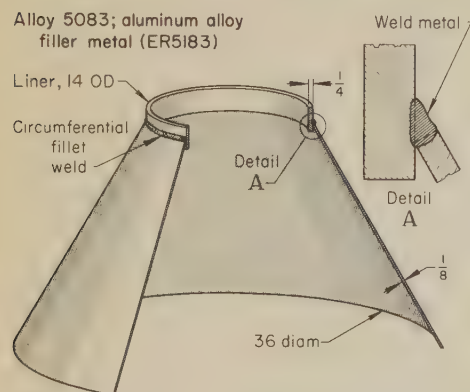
Cone and liner ring that were joined by a small fillet weld to minimize distortion
